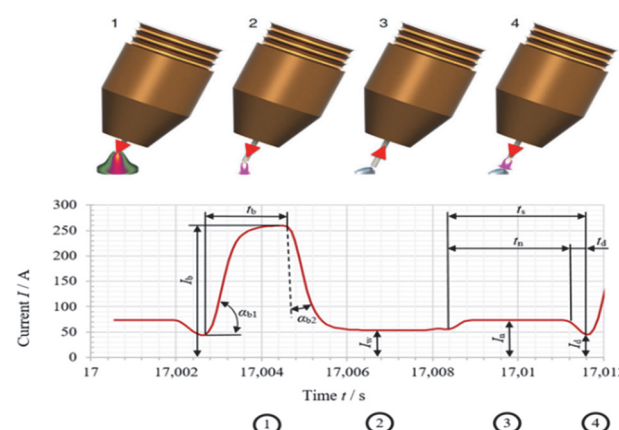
The MAG-CMT process - 1. During arc ignition, the filler material moves towards the weld pool, 2. When filler material reaches the weld pool, the arc is extinguished - current is lowered, 3. Wire back-drawing detaches the droplet during short circuiting - short circuit remains with low current, 4. There is an additional wire back-drawing and the process is repeated continuously
